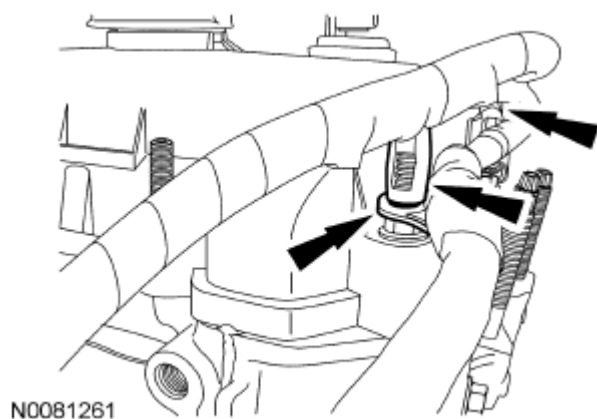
Locating Wiring Harness Retainers And RH Side Valve Cover Stud Bolts
